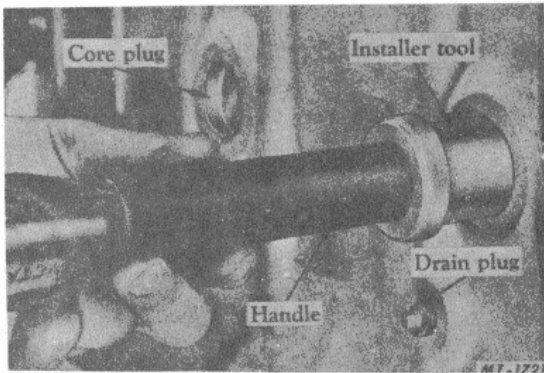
Installing Core Plug Using SE1725 Installer Tool with SE1581B Handle.
